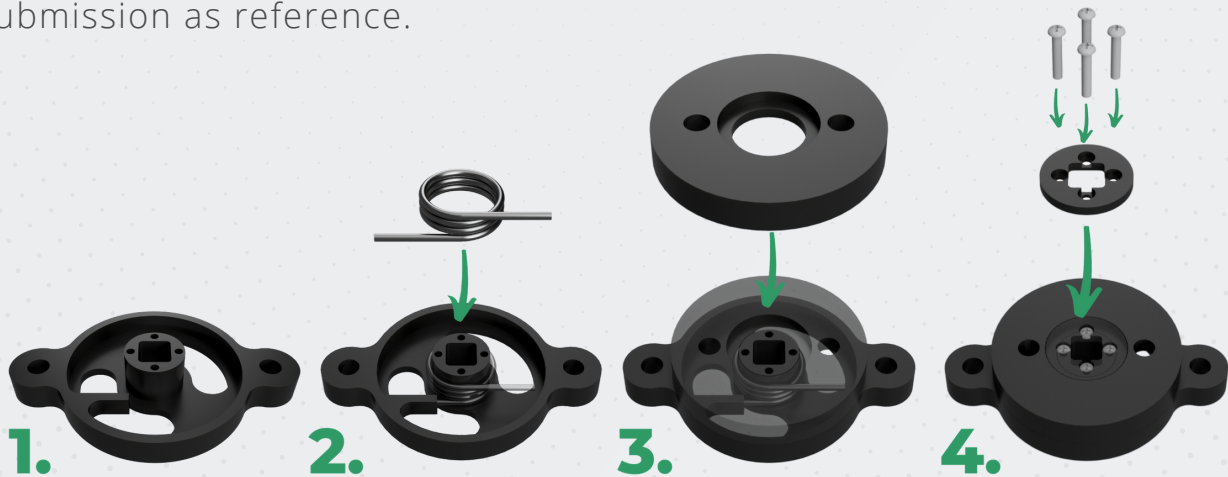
Low-Profile Torsional Tensor Assembly. 1-2) Insert torsion spring. 2-3) Attach Tensioned Plate. 3-4) Screw lid onto Ground Plate with Lid Screws.
